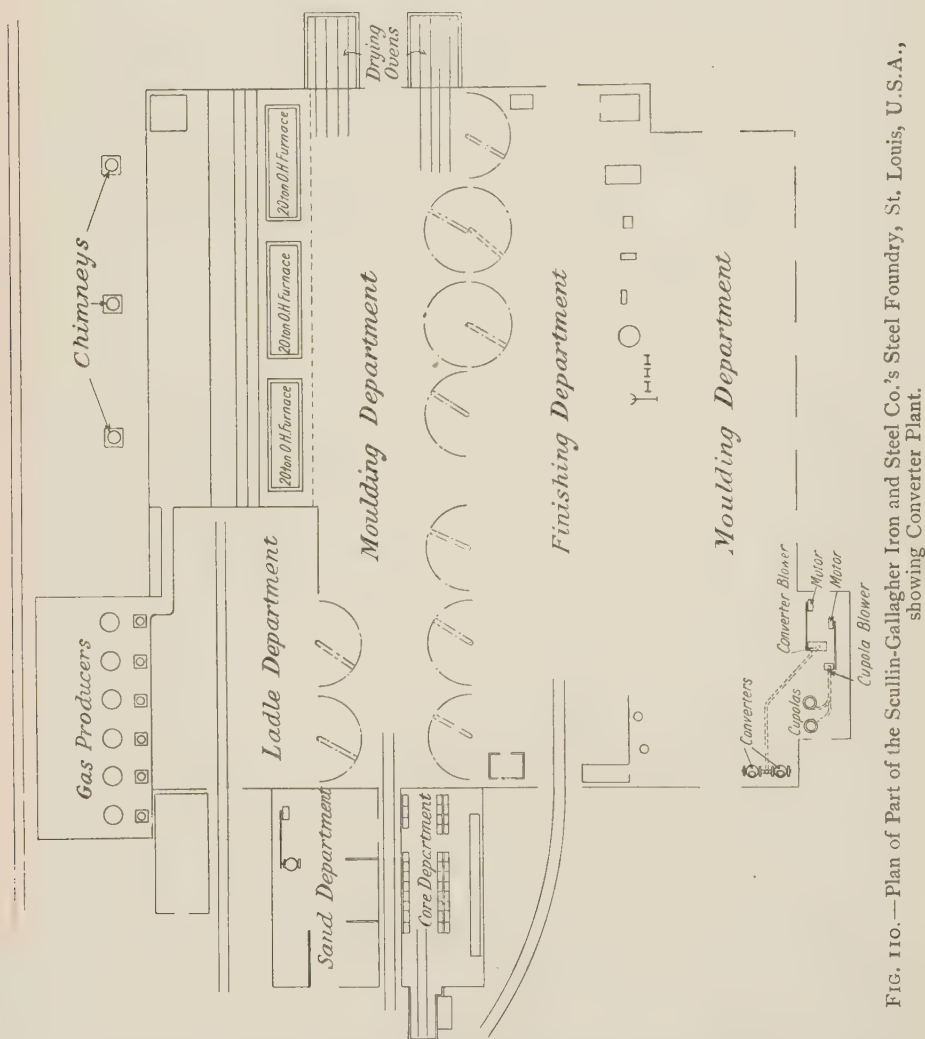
Plan of Part of the Scullin-Gallagher Iron and Steel Co.'s Steel Foundry, St. Louis, U.S.A., showing Converter Plant.
